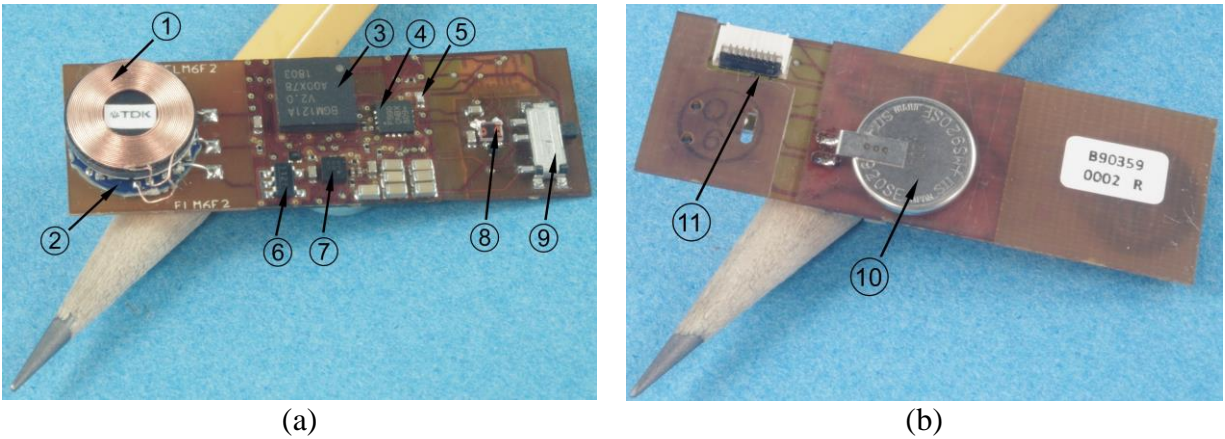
Photos of the manufactured ELM6 flexible PCB: (a) top and (b) bottom view.
